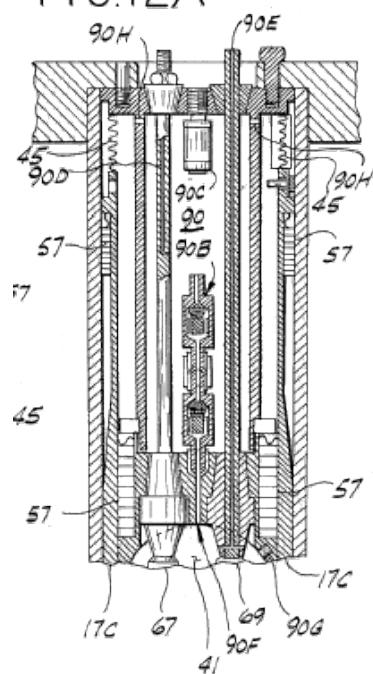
A is a cross-sectional view similar to FIGS. 5 and 12, but on a reduced scale and with parts broken away, showing an additional embodiment of a cylinder head used in an engine of this invention;
